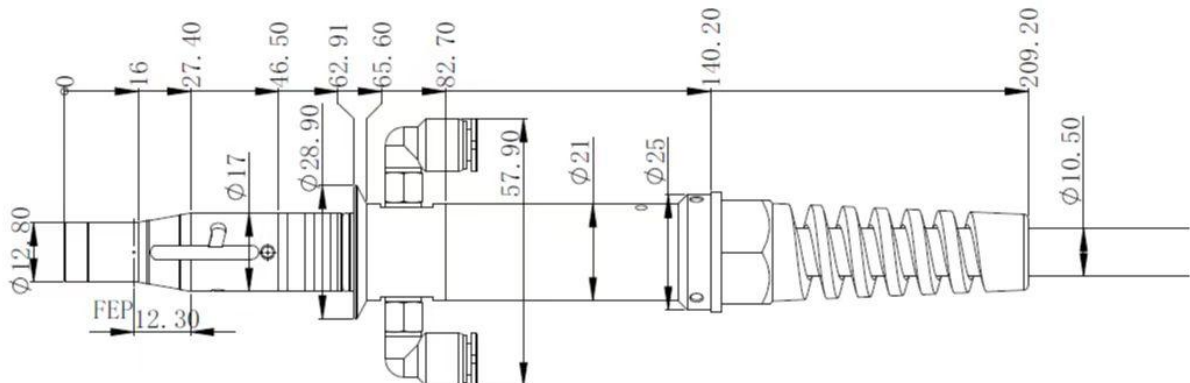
Dimensional drawing of QBH output optical cable (unit: mm)
